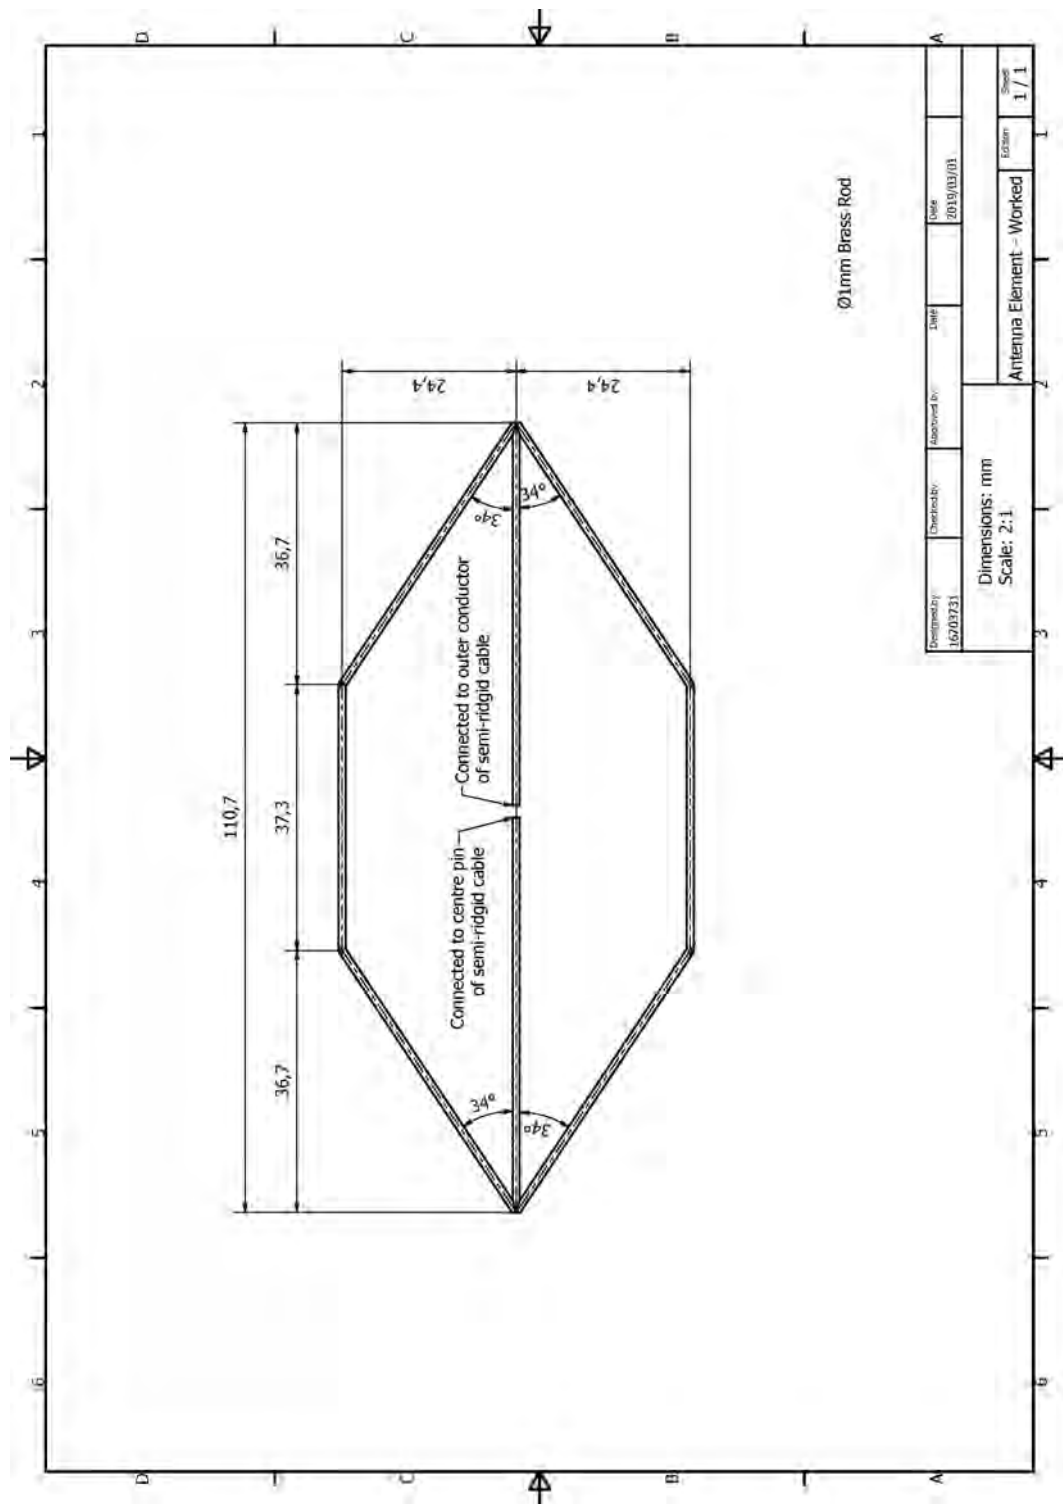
1:100 scale model antenna element engineering drawing. This engineering drawing shows the worked $\varnothing 1$ mm brass rod used to create the antenna elements of both models.
